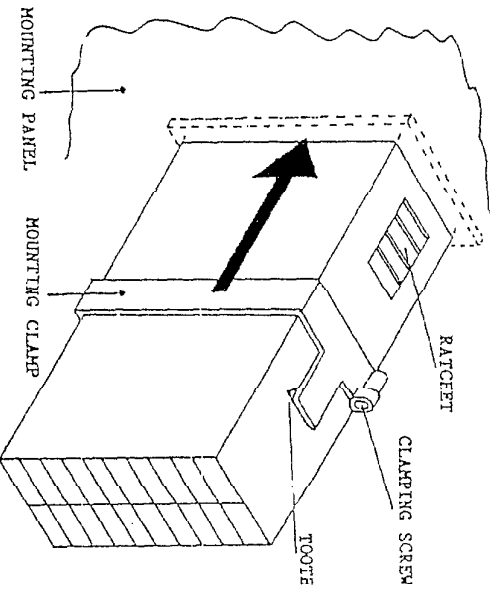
ATTACHMENT OF HOUSING TO MOUNTING PANEL
